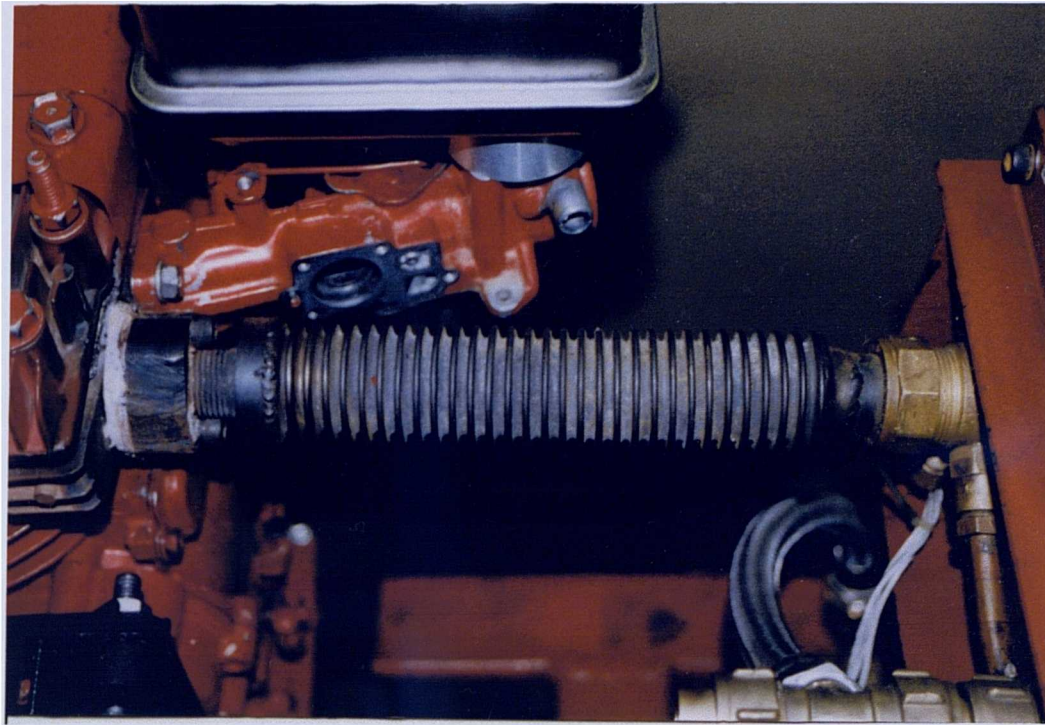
Flexible Exhaust Link Fitted to EHE3 and Engine
